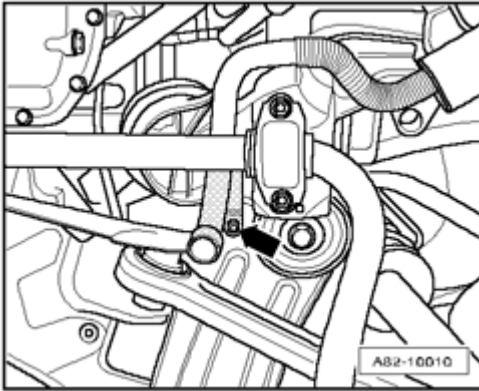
Removing Bolt For Corrugated Exhaust Pipe
